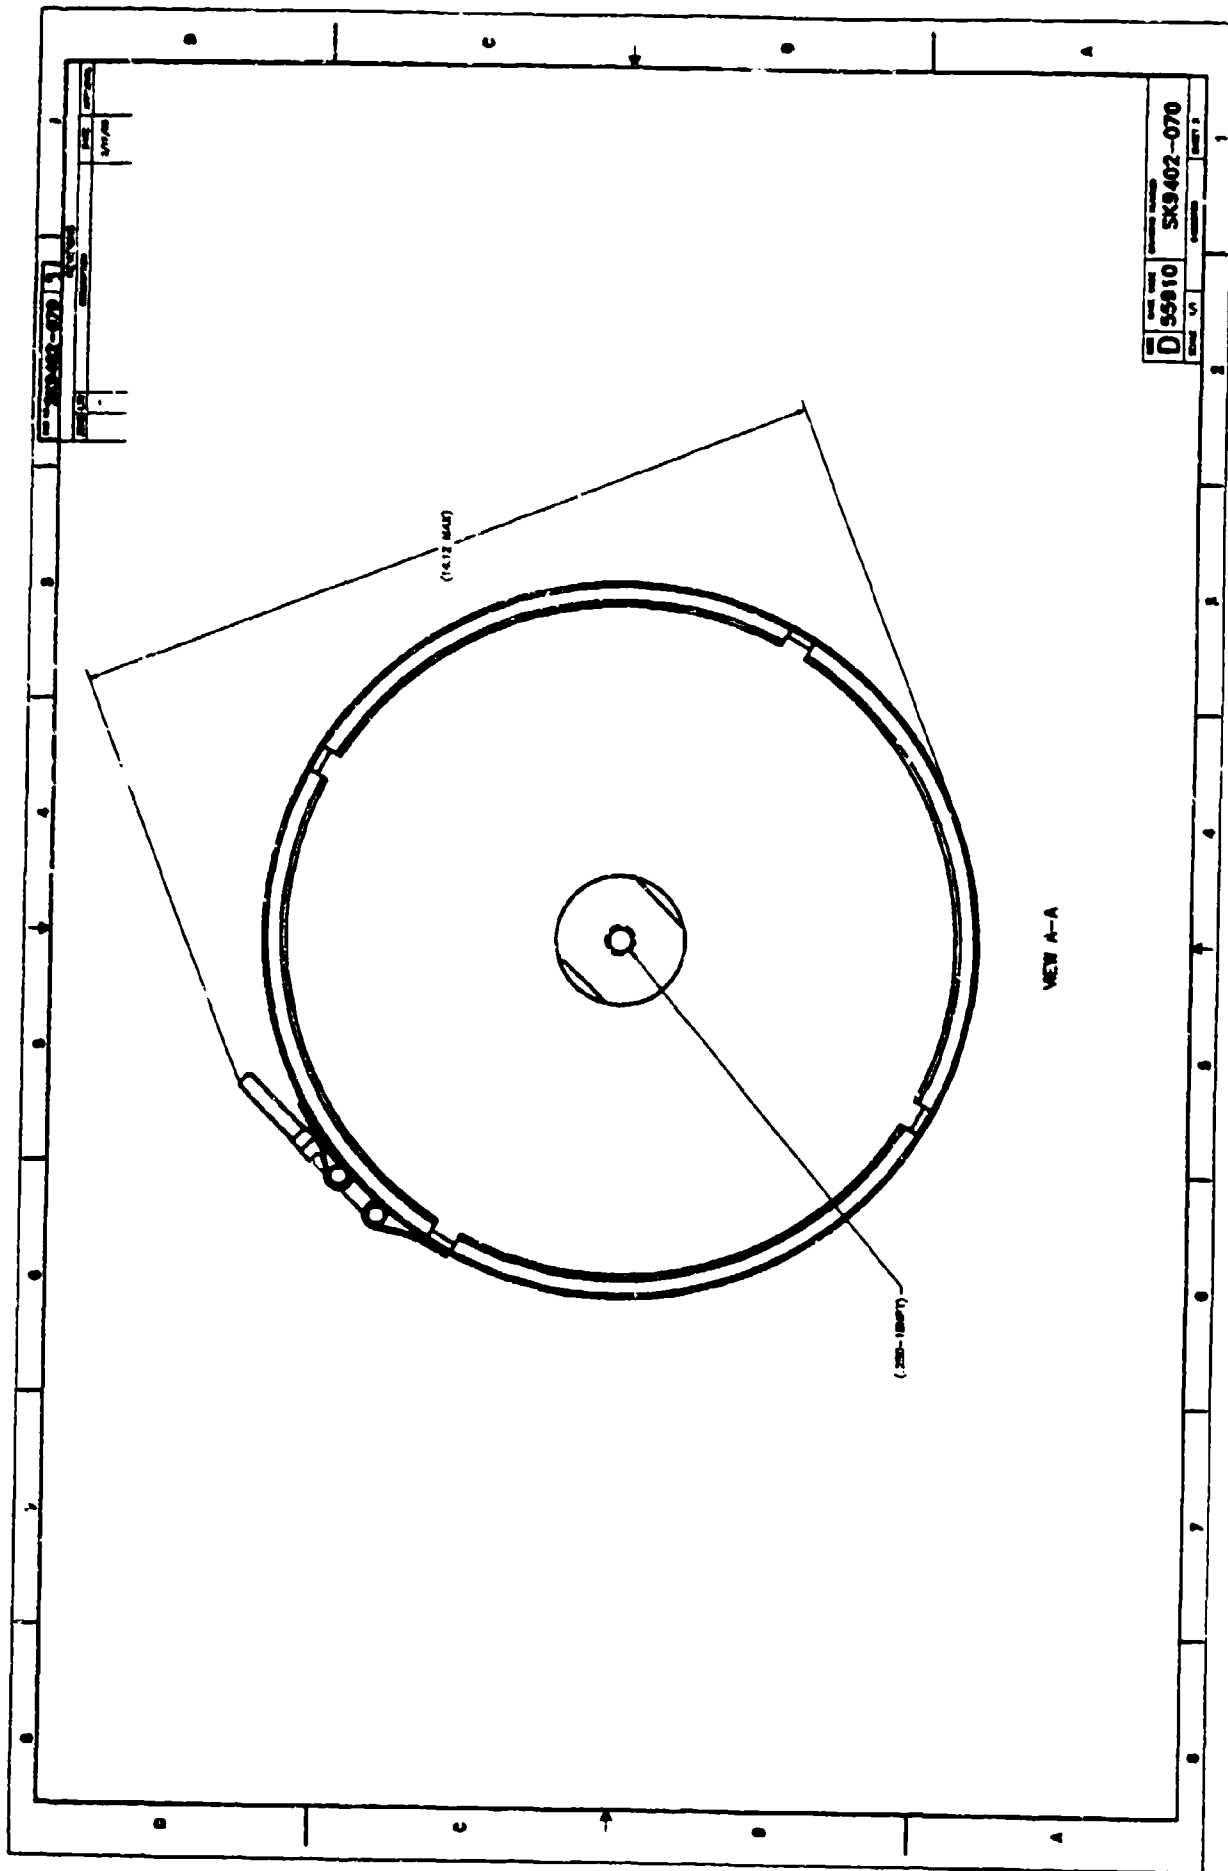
12-inch cylinder test assembly, Type 1 configuration, Sheet 3.
